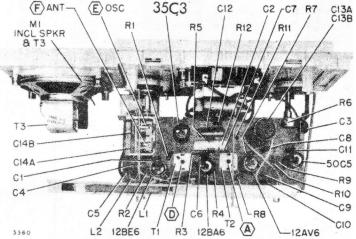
Top View of Chassis. Location of components and alignment points shown.
